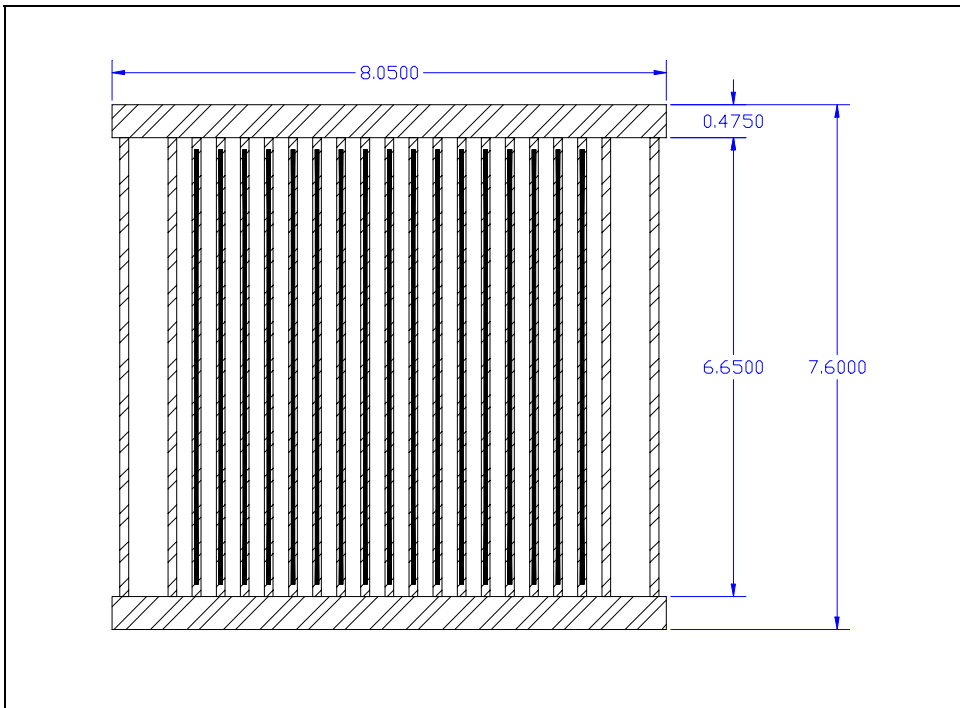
Cross Sectional View of IAEA 17-Plate Control Fuel Assembly. Filled regions represent fuel and hatched regions represent aluminum. Note: The control fuel assembly is similar to the standard fuel assembly with plate numbers 1,3,21, and 23 replaced by aluminum plates and plate numbers 2 and 22 removed.
